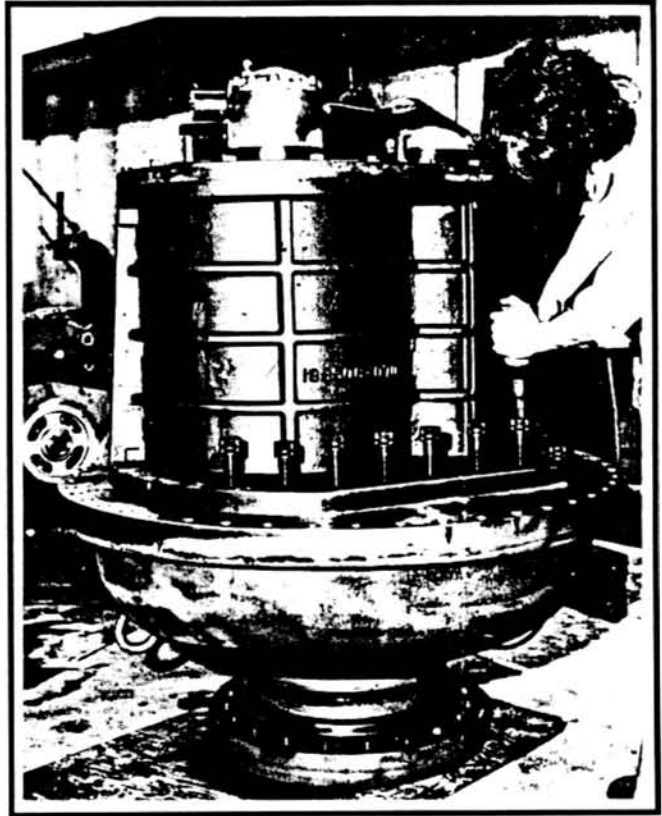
Mount and secure measuring unit assembly to end cover.
